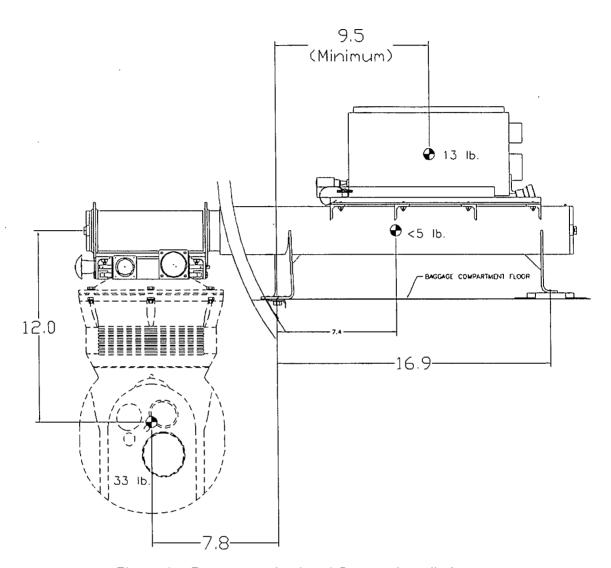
Representative Load Support Installation: IR-431-1 Assembly (Gimbal attached to IR-4301-10 and SX5-606-1), IR-1040-(X), C182IR-1012-1
